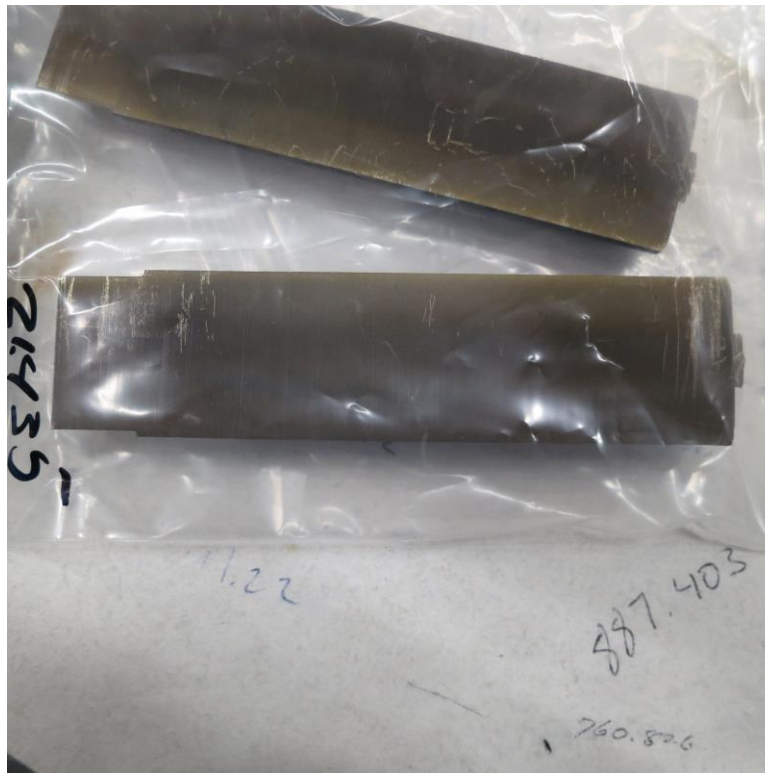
DU-10Zr billet cut cross section showing no voids nor inclusions.
